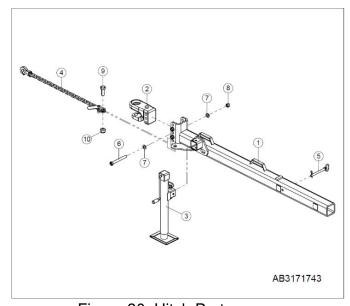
Hitch Parts Key 2 – Lower Hitch Bolt
